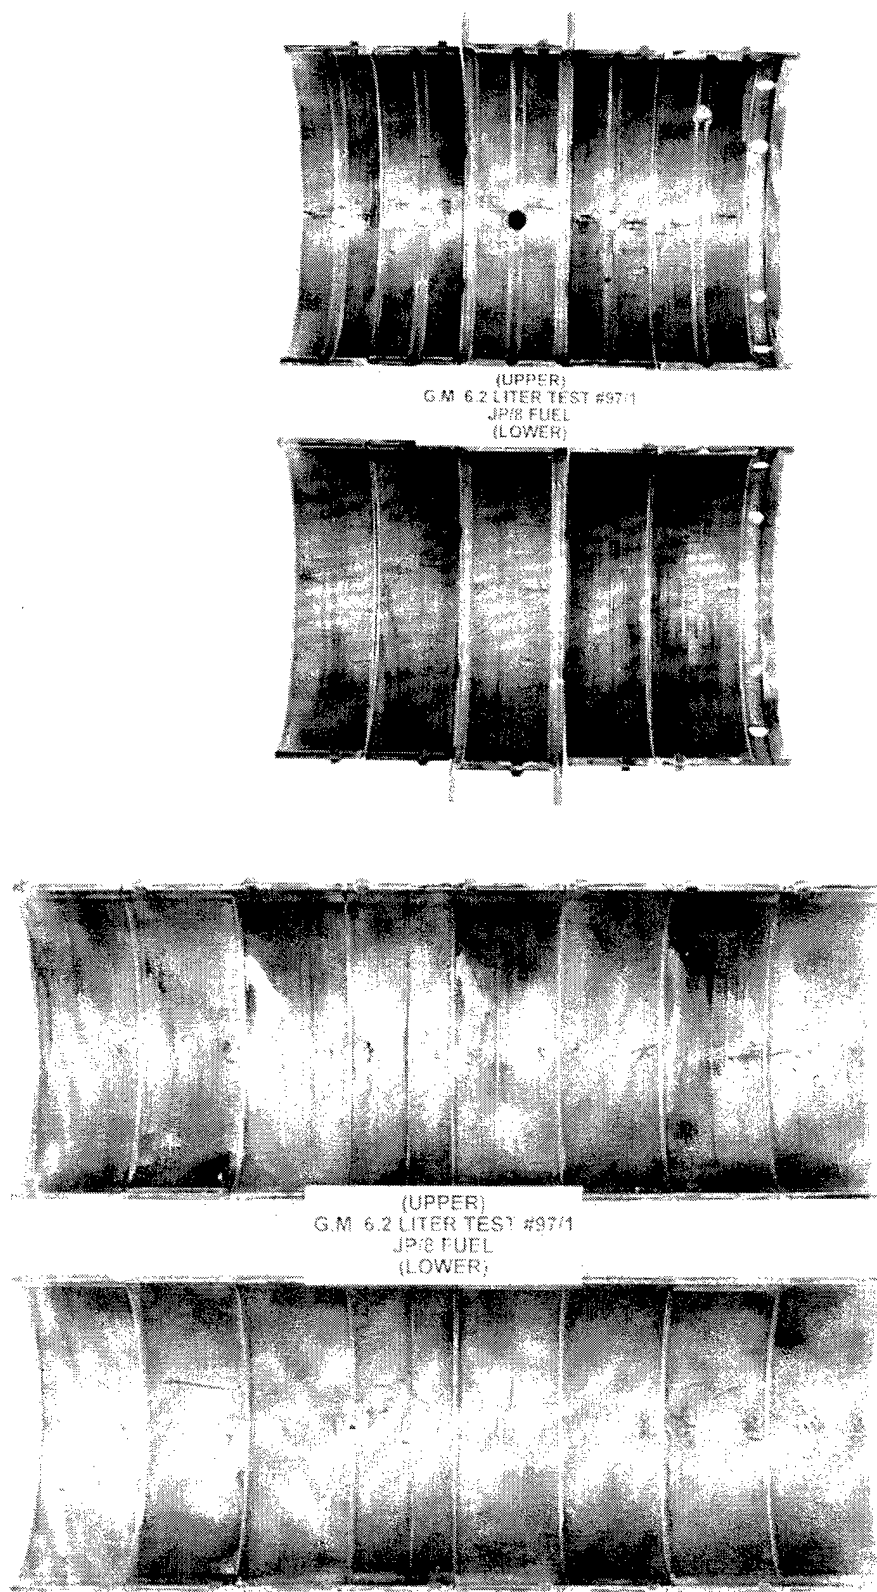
G.M. 6.2 Liter Test 97-1, JP-8 Fuel, Bearings (Upper and Lower)
